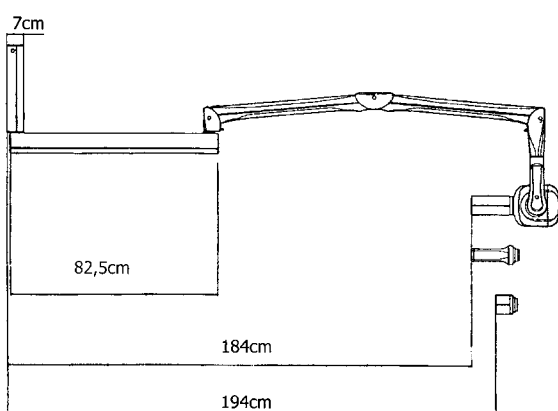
A, 1B, 1C give the overall dimensions of the possible supply conditions:
